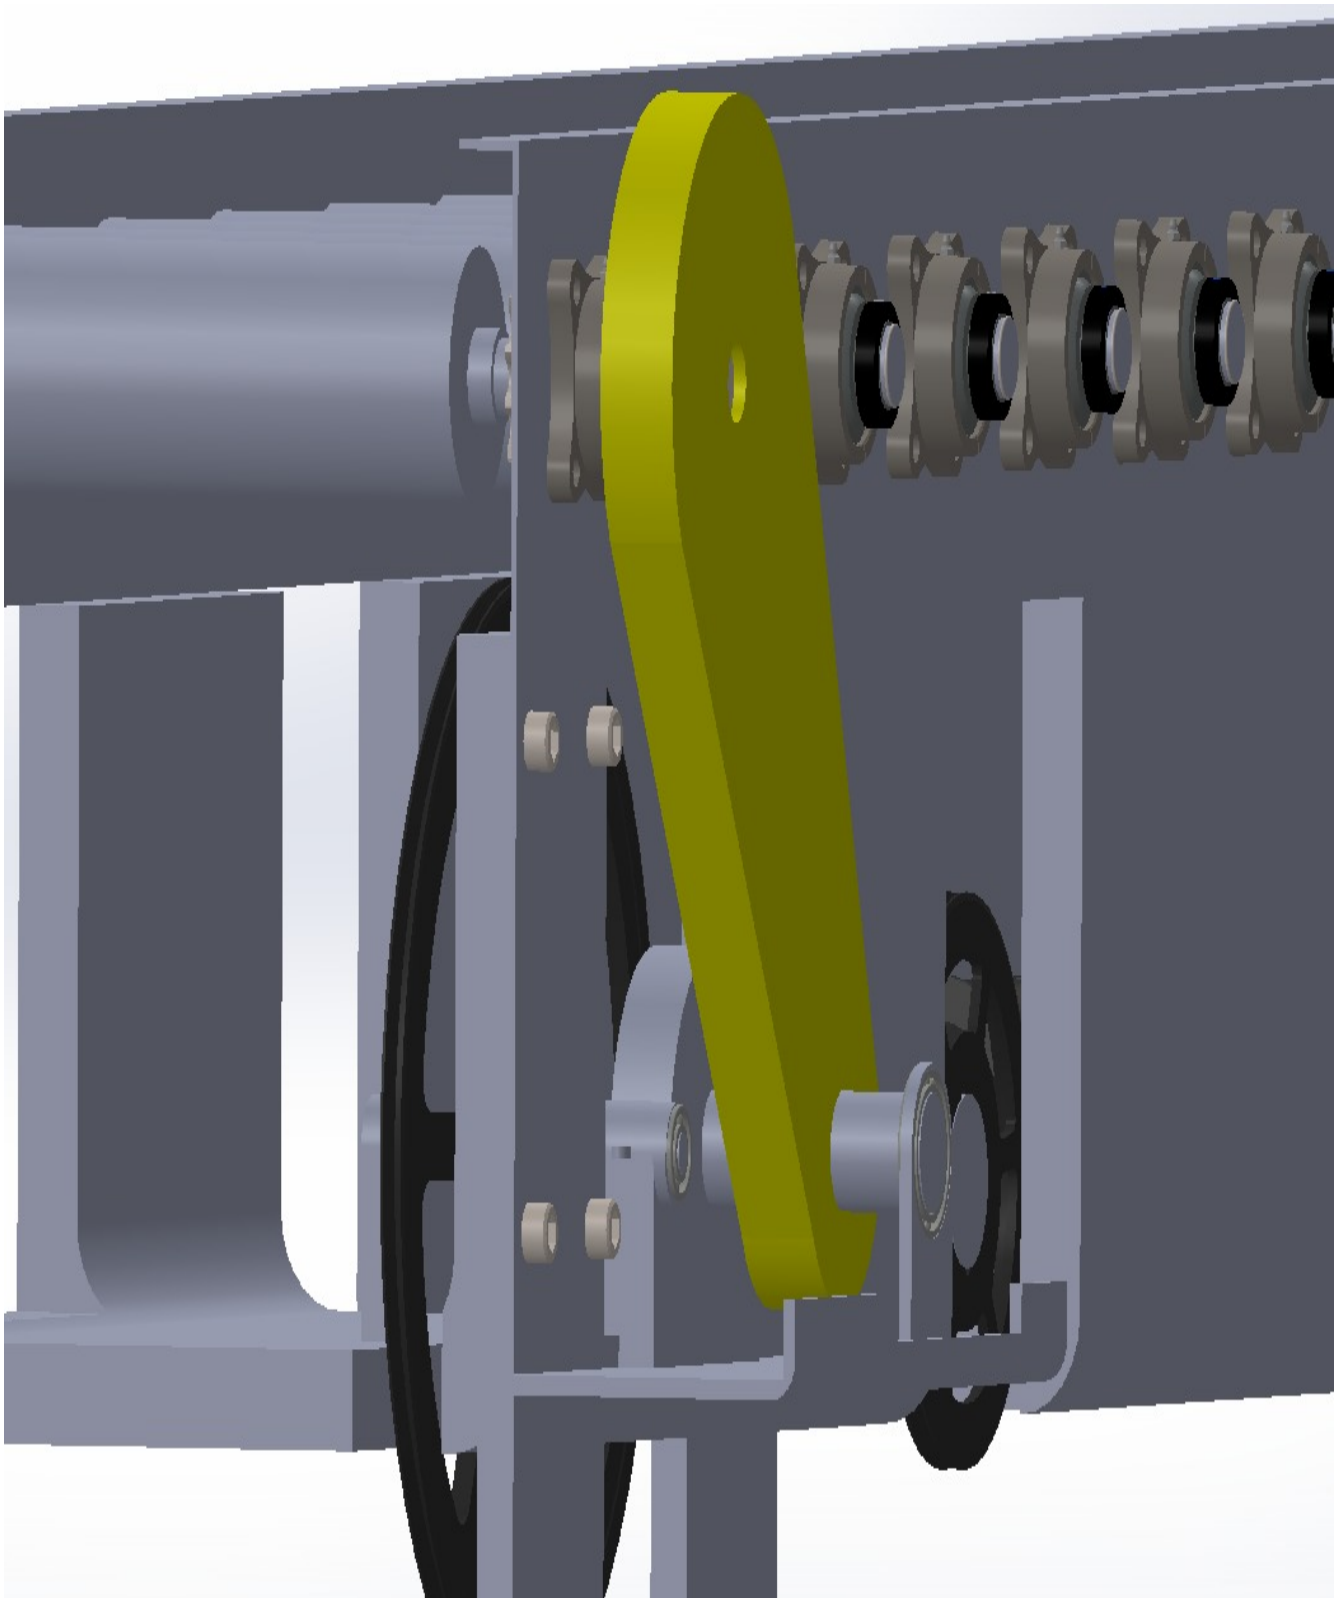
Protective Cover on the Chain Transmitting Power from Gearbox to Roller.
